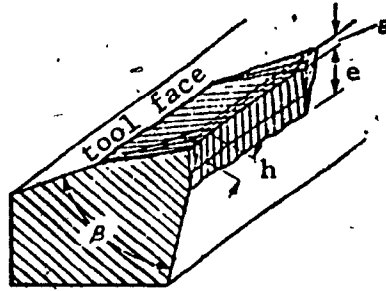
Wear land on tool flank e and displacement of cutting edge a .
